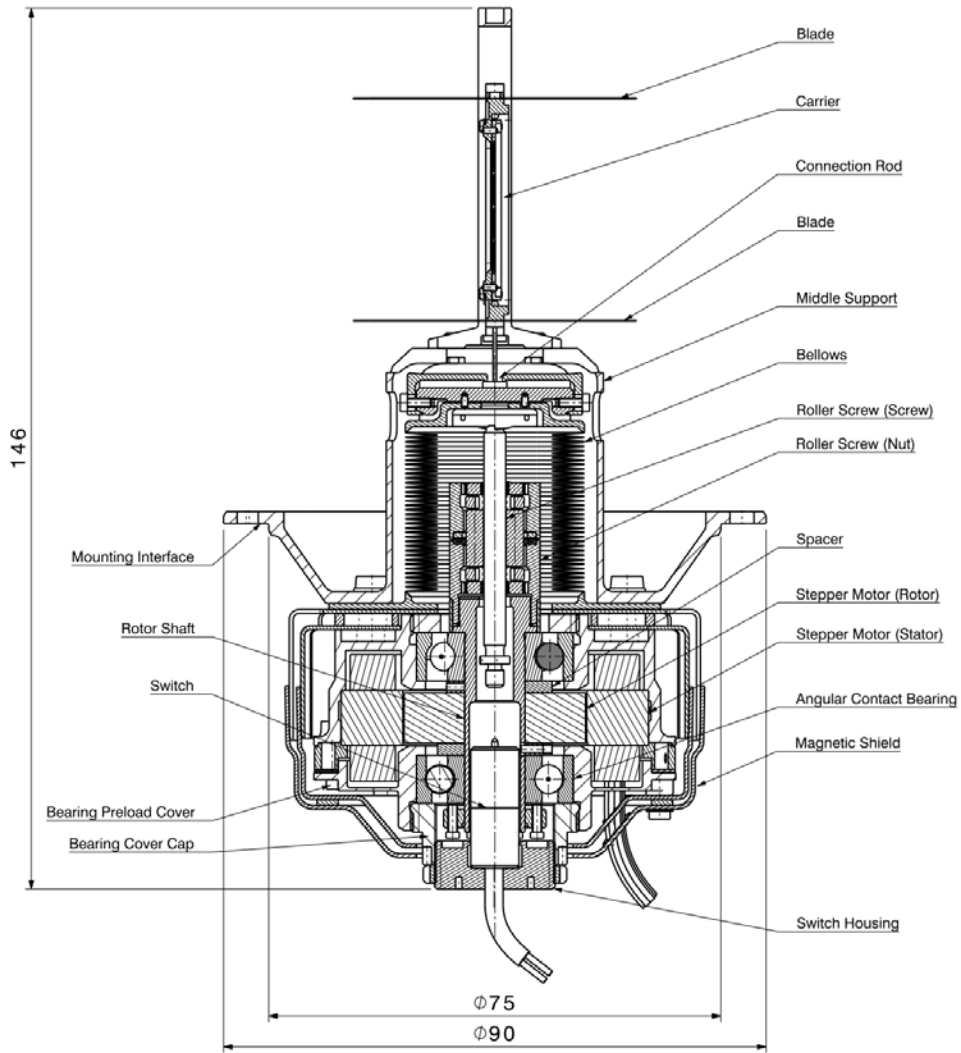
Cut view of the linear Slit Change Mechanism design – dimensions in mm
